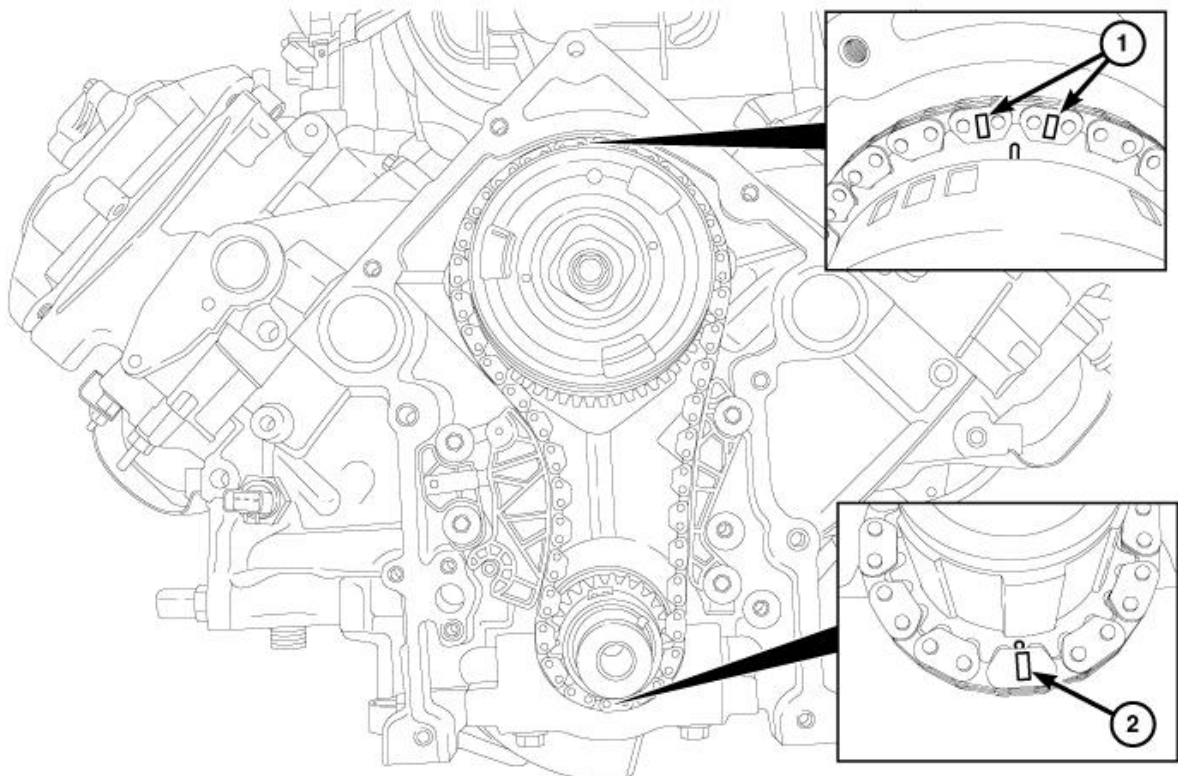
Crankshaft Gear Mark & Timing Chain Mark
